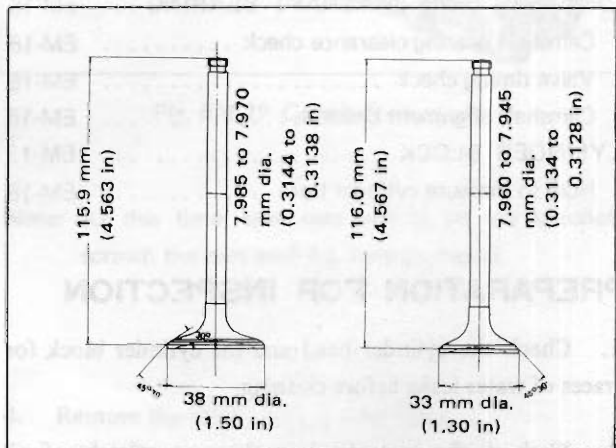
Valves for L20A and L24 (Single carb.)
